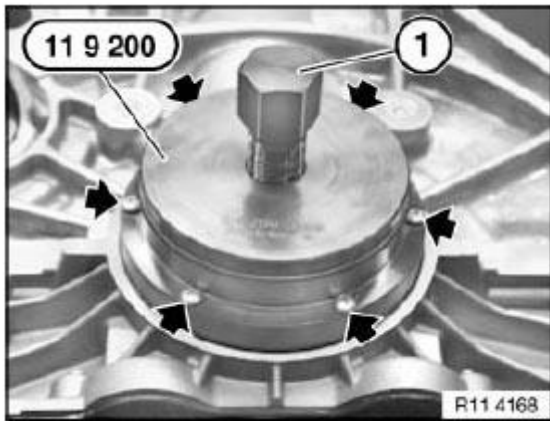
Identifying Special Tool 11 9 200 And Spindle
